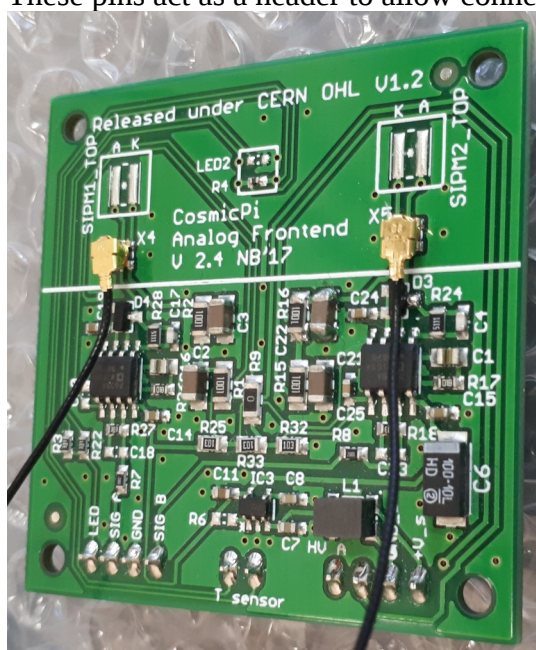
Top side of the Analogue PCB with u.FL connectors fitted and connected.
